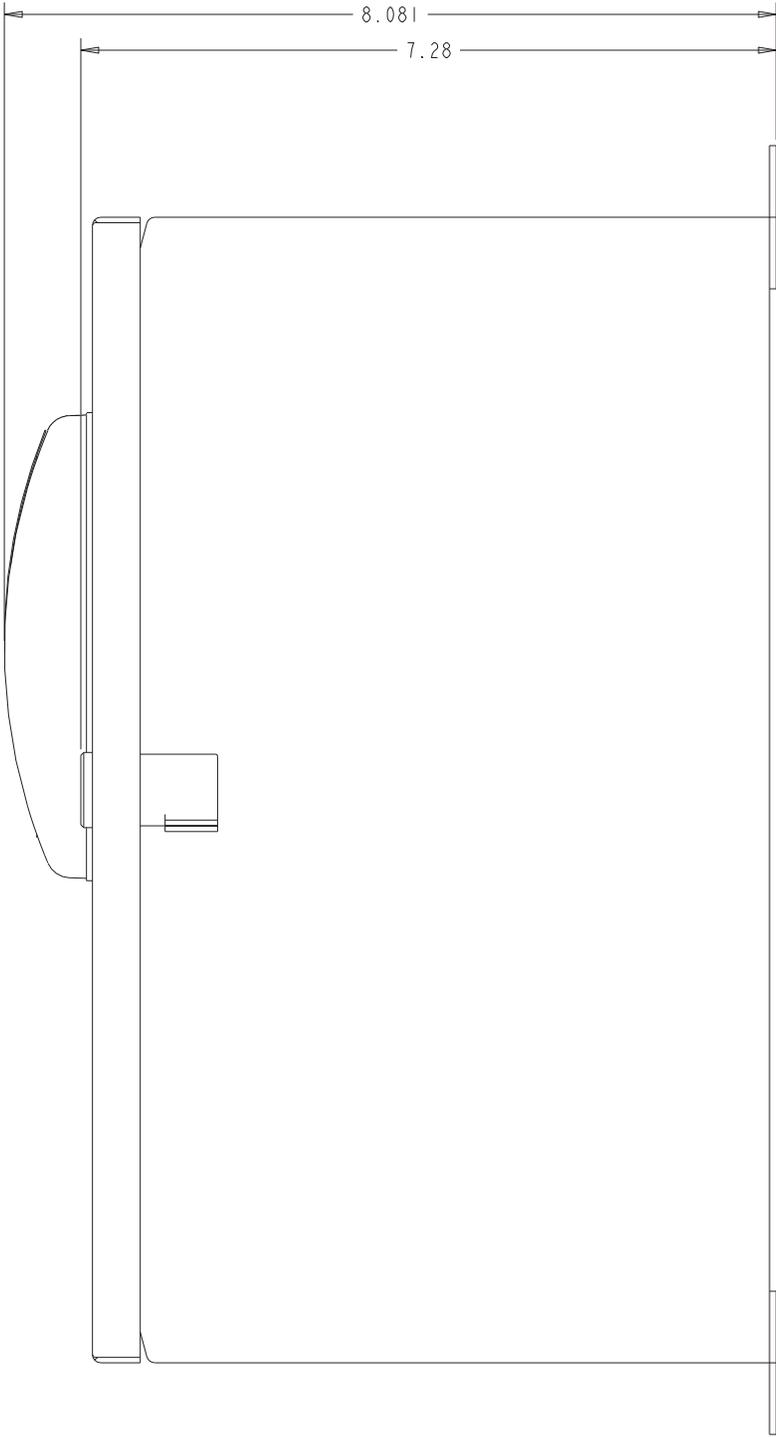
NEMA 1 Enclosure Side Dimensions
